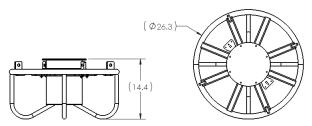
Front and Top View of the 8 Hook Carousel Cage (C2-8HC) shown without hooks.
